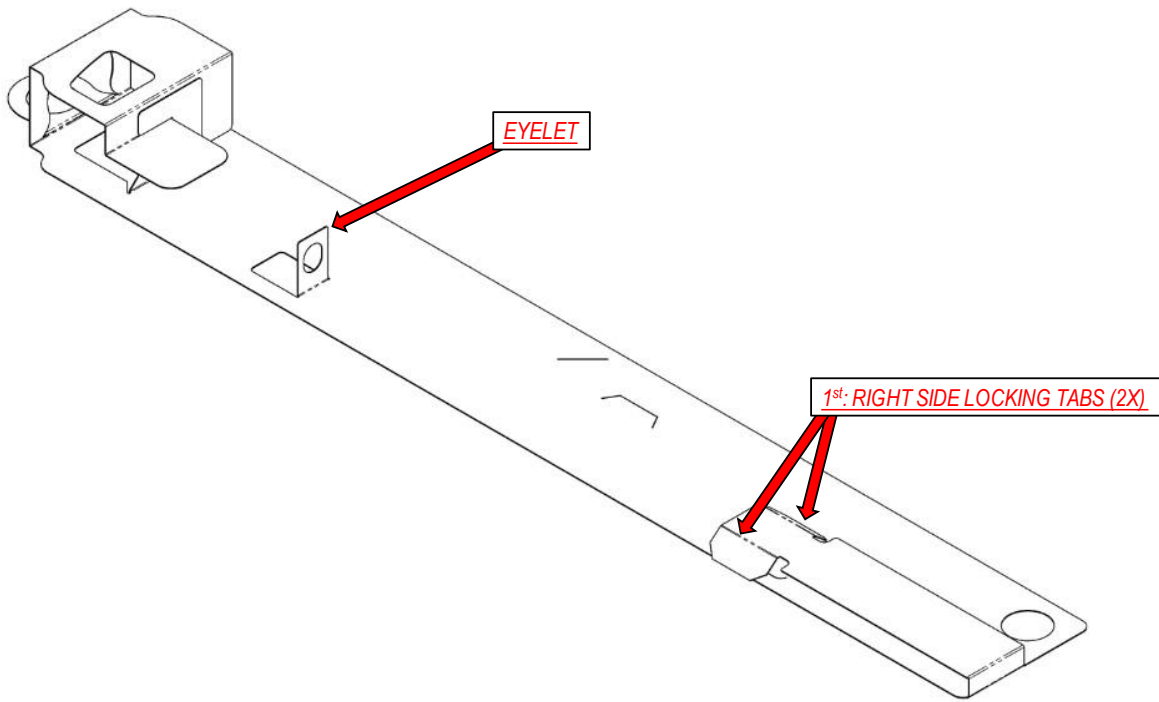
Prepare Folded Backer Card for Robotic Assembly
